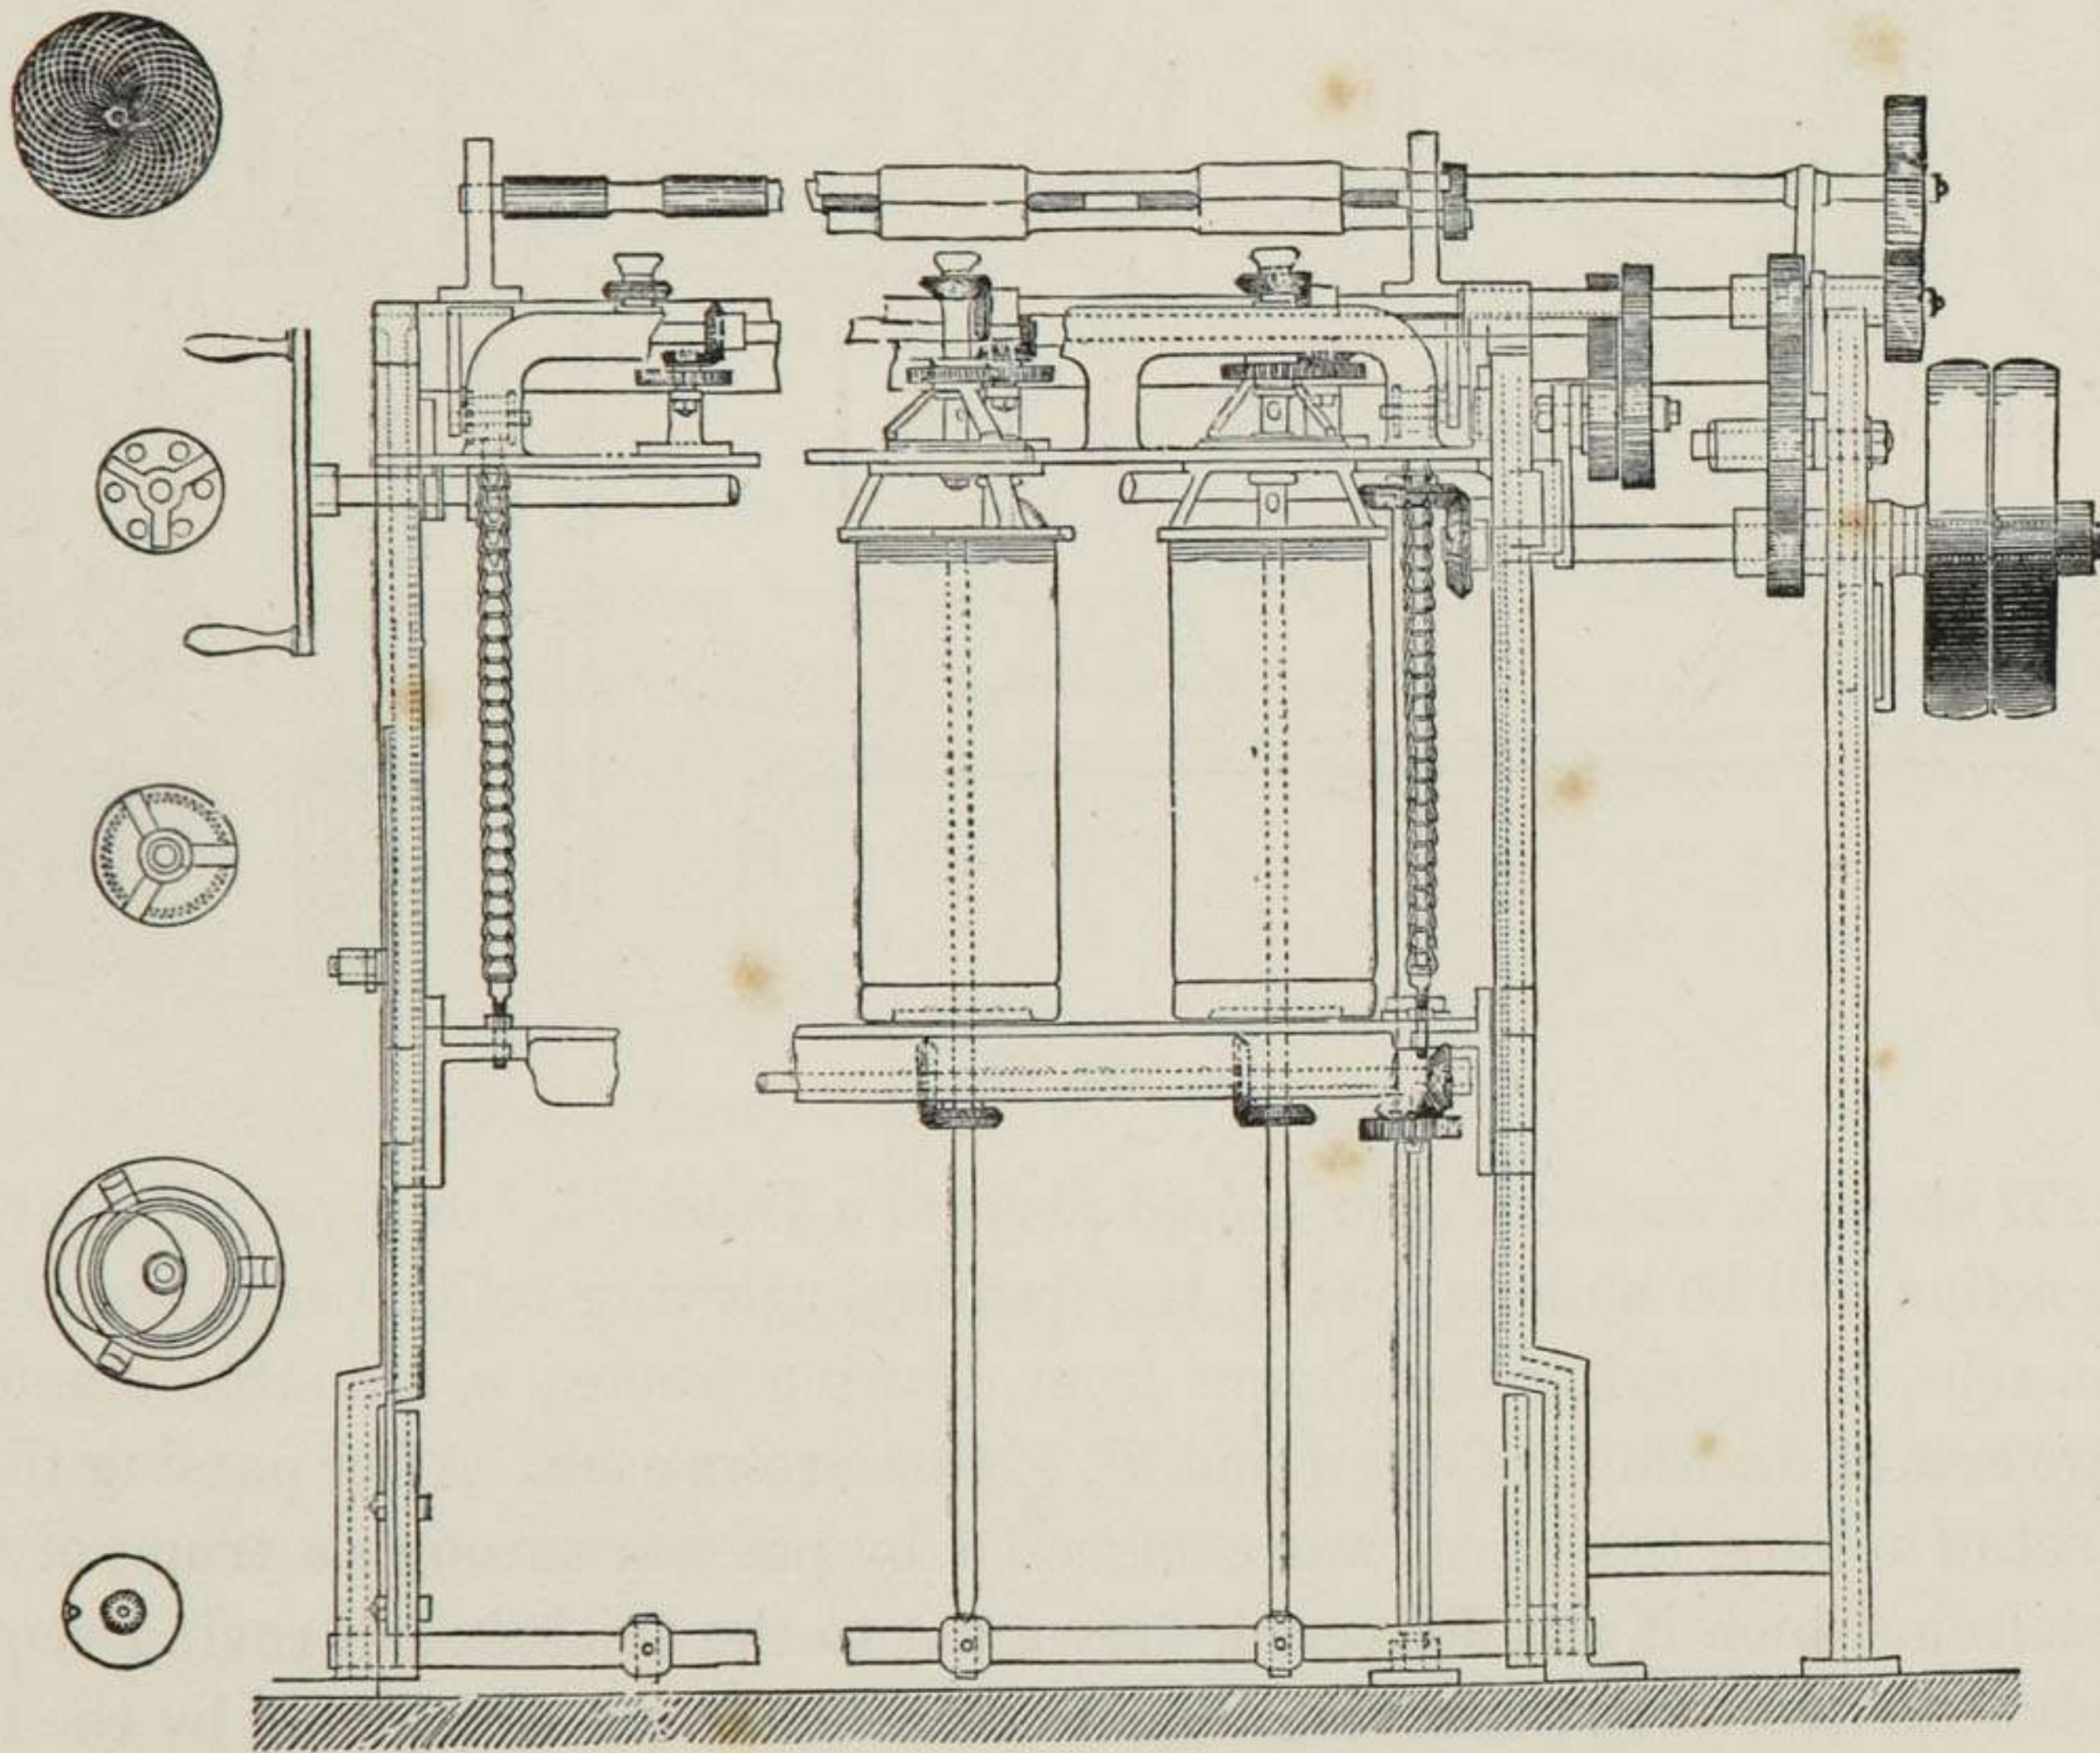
The Abegg Roving Frame. (Front Elevation.)
